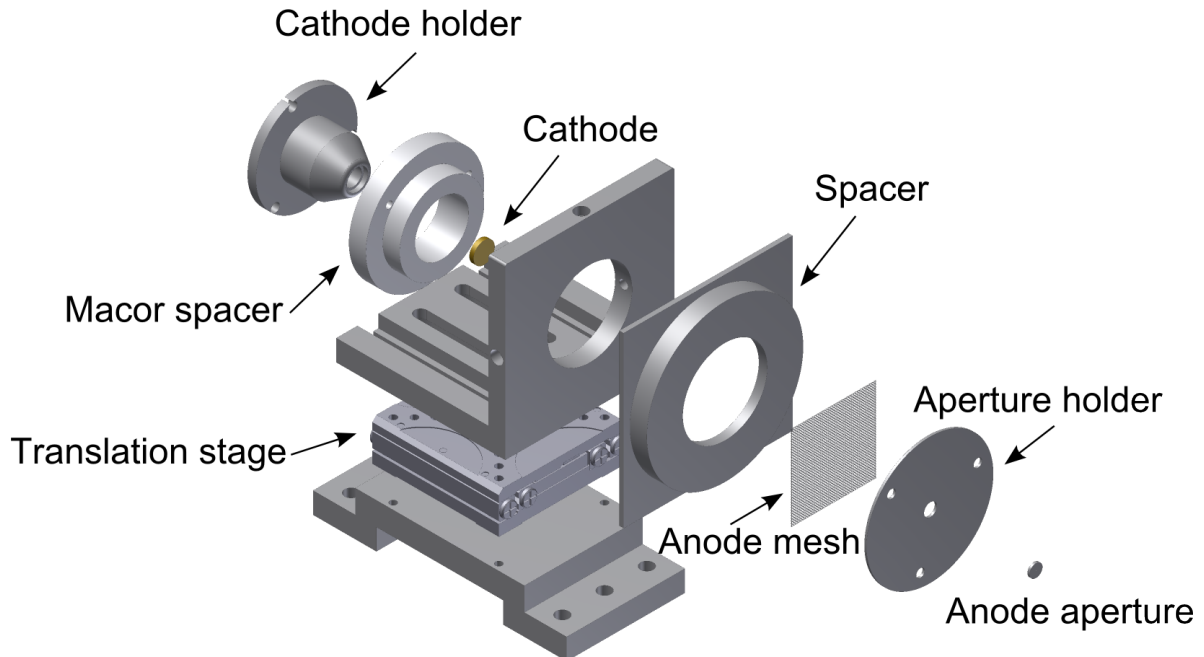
Simplified exploded drawing of the electron gun
